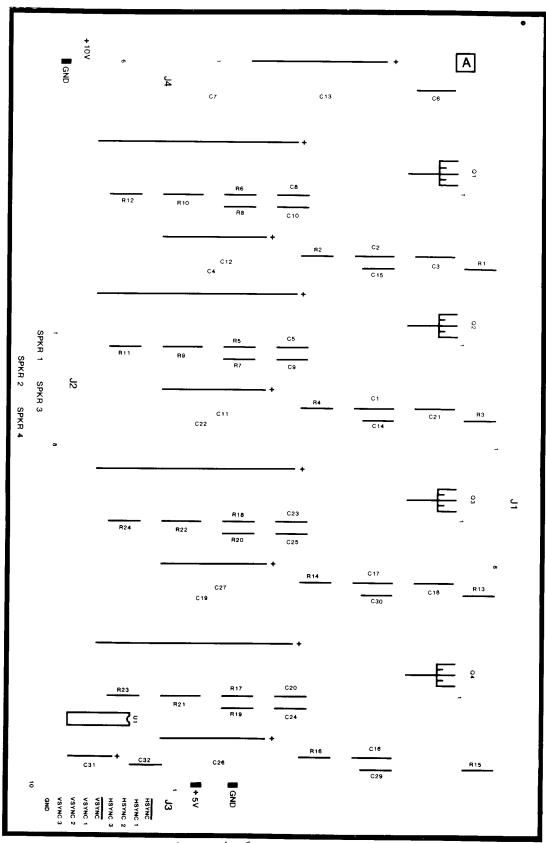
TX-1 Audio PCB Assembly A042016-01 A
